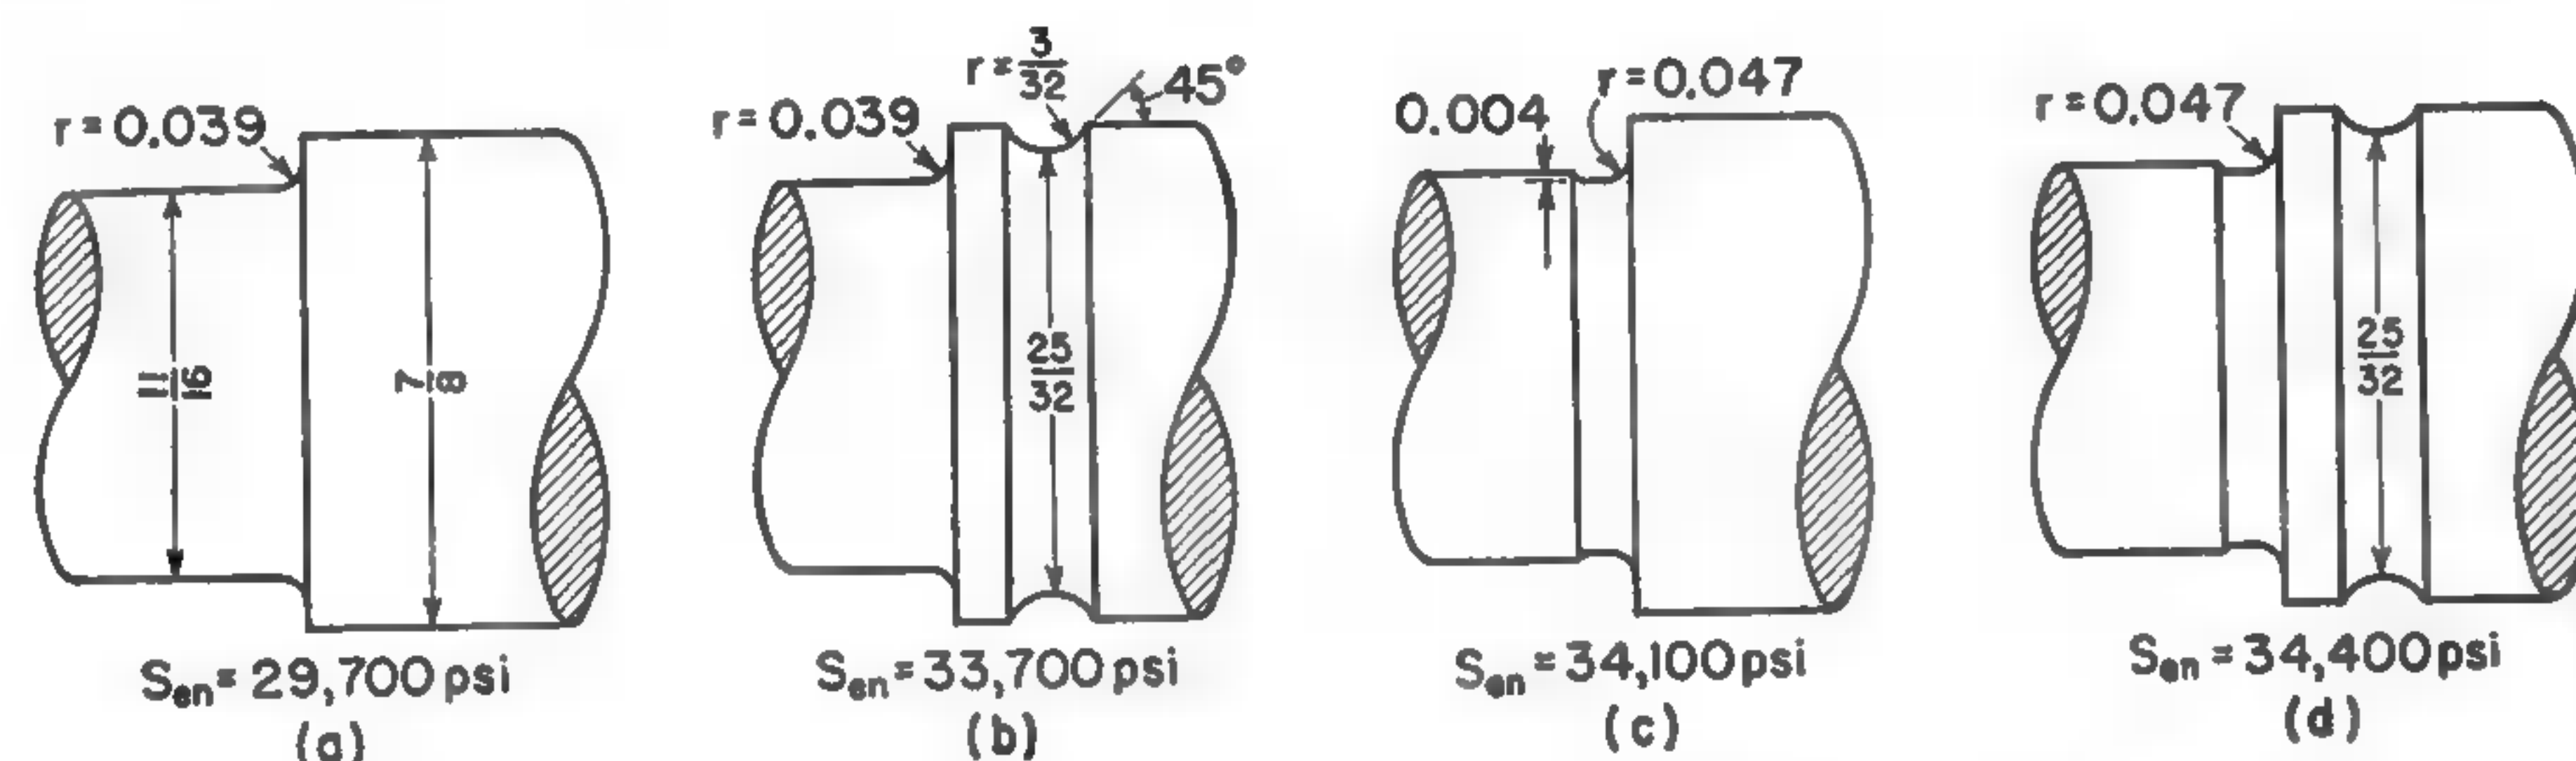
Methods of increasing endurance of a shaft in bending.
